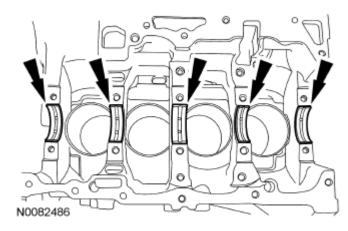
Locating Main Bearings Courtesy of FORD MOTOR CO.
